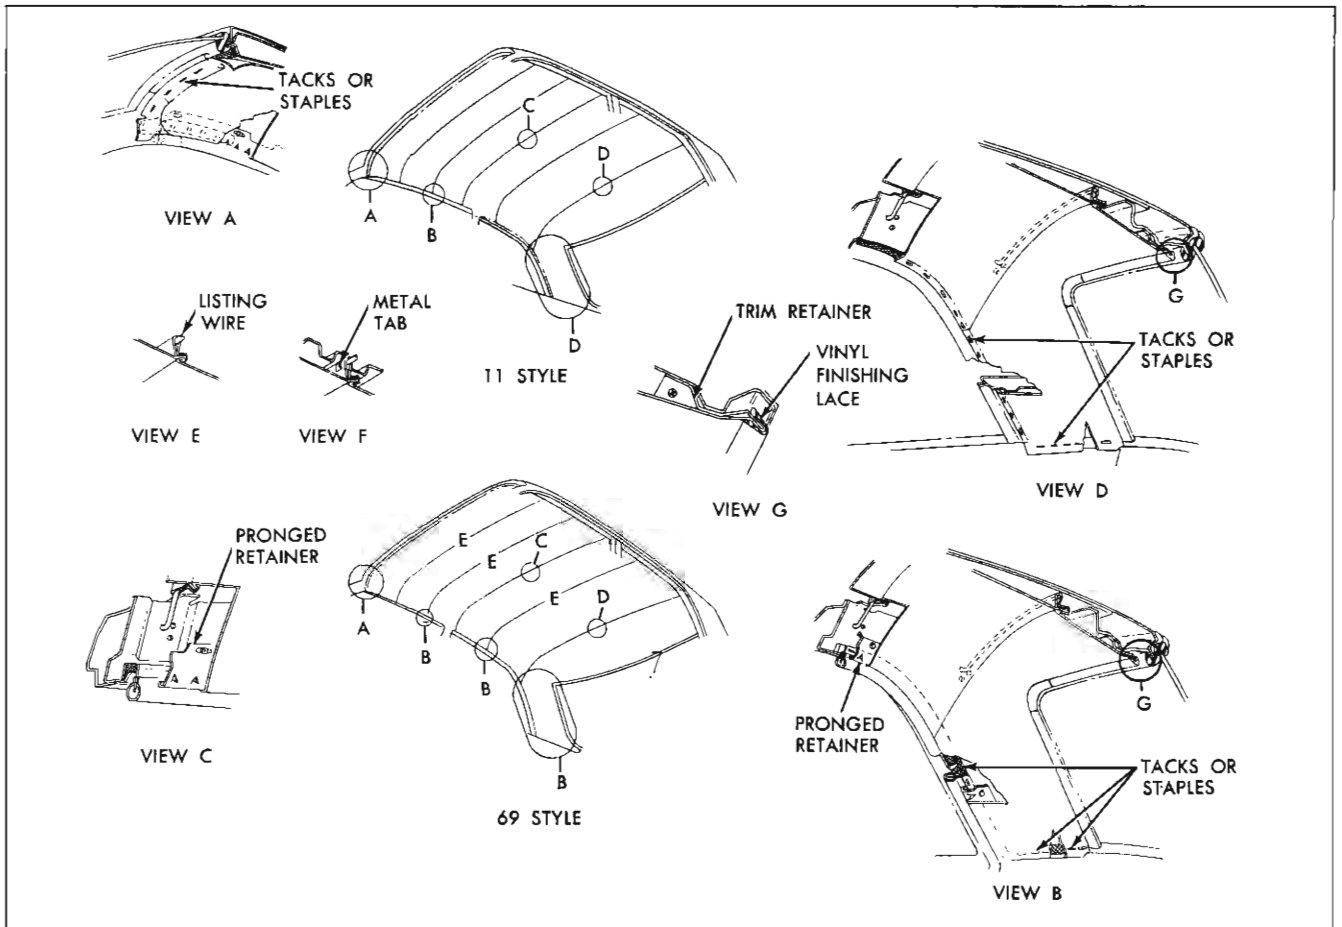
Headlining Installation - 11 and 69 Styles
